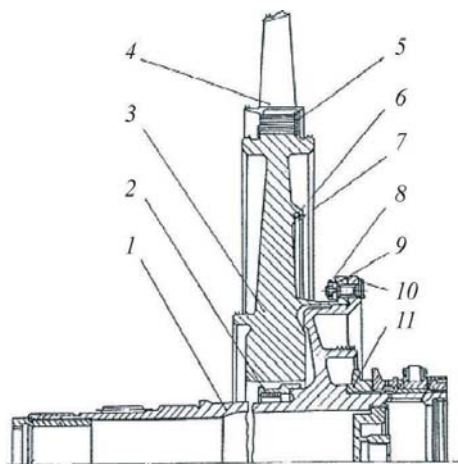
Low-pressure turbine rotor of the Zorya-Mashproekt UGT15000 engine
